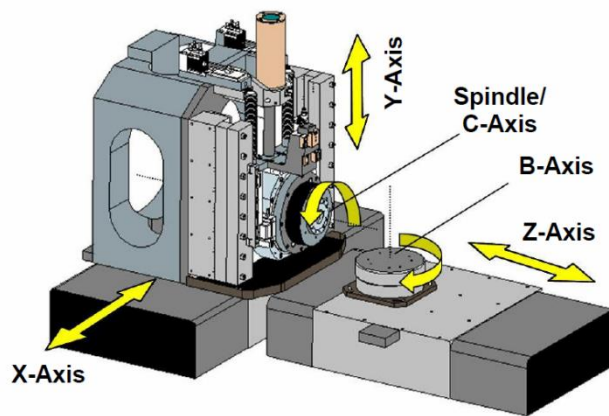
Schematic representation of the four-axis diamond turning machine 350 FG [2].
